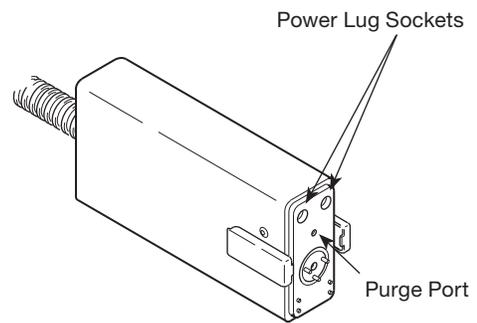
Cleaning the Power Lug Sockets and the Purge Port
